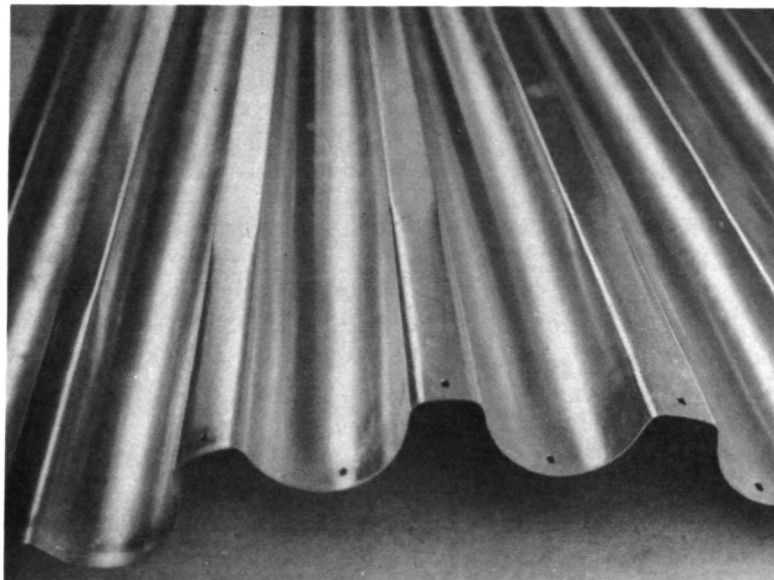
CIRCULAR TUBE PANEL FACE SHOWING INCREASED FORMING RADIUS AT ENDS
